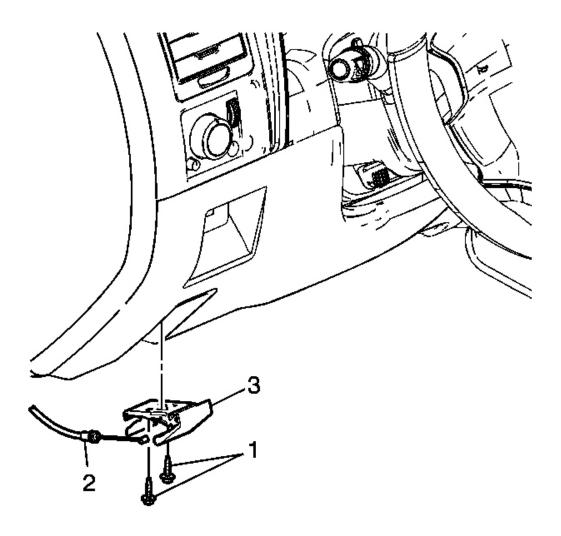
Identifying Hood Release Handle Courtesy of GENERAL MOTORS CORP.
